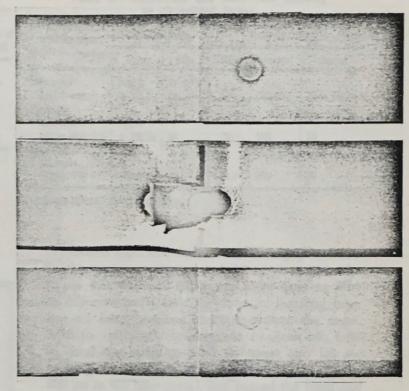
Spot welded specimens (top) demonstrated adequate nugget size (center) and good corrosion resistance (bottom) in boiling nitric acid. Severe edge attack indicates that chromized steel components intended for corrosive service should be protected at edges by proper weld design or selection of welding procedure.
